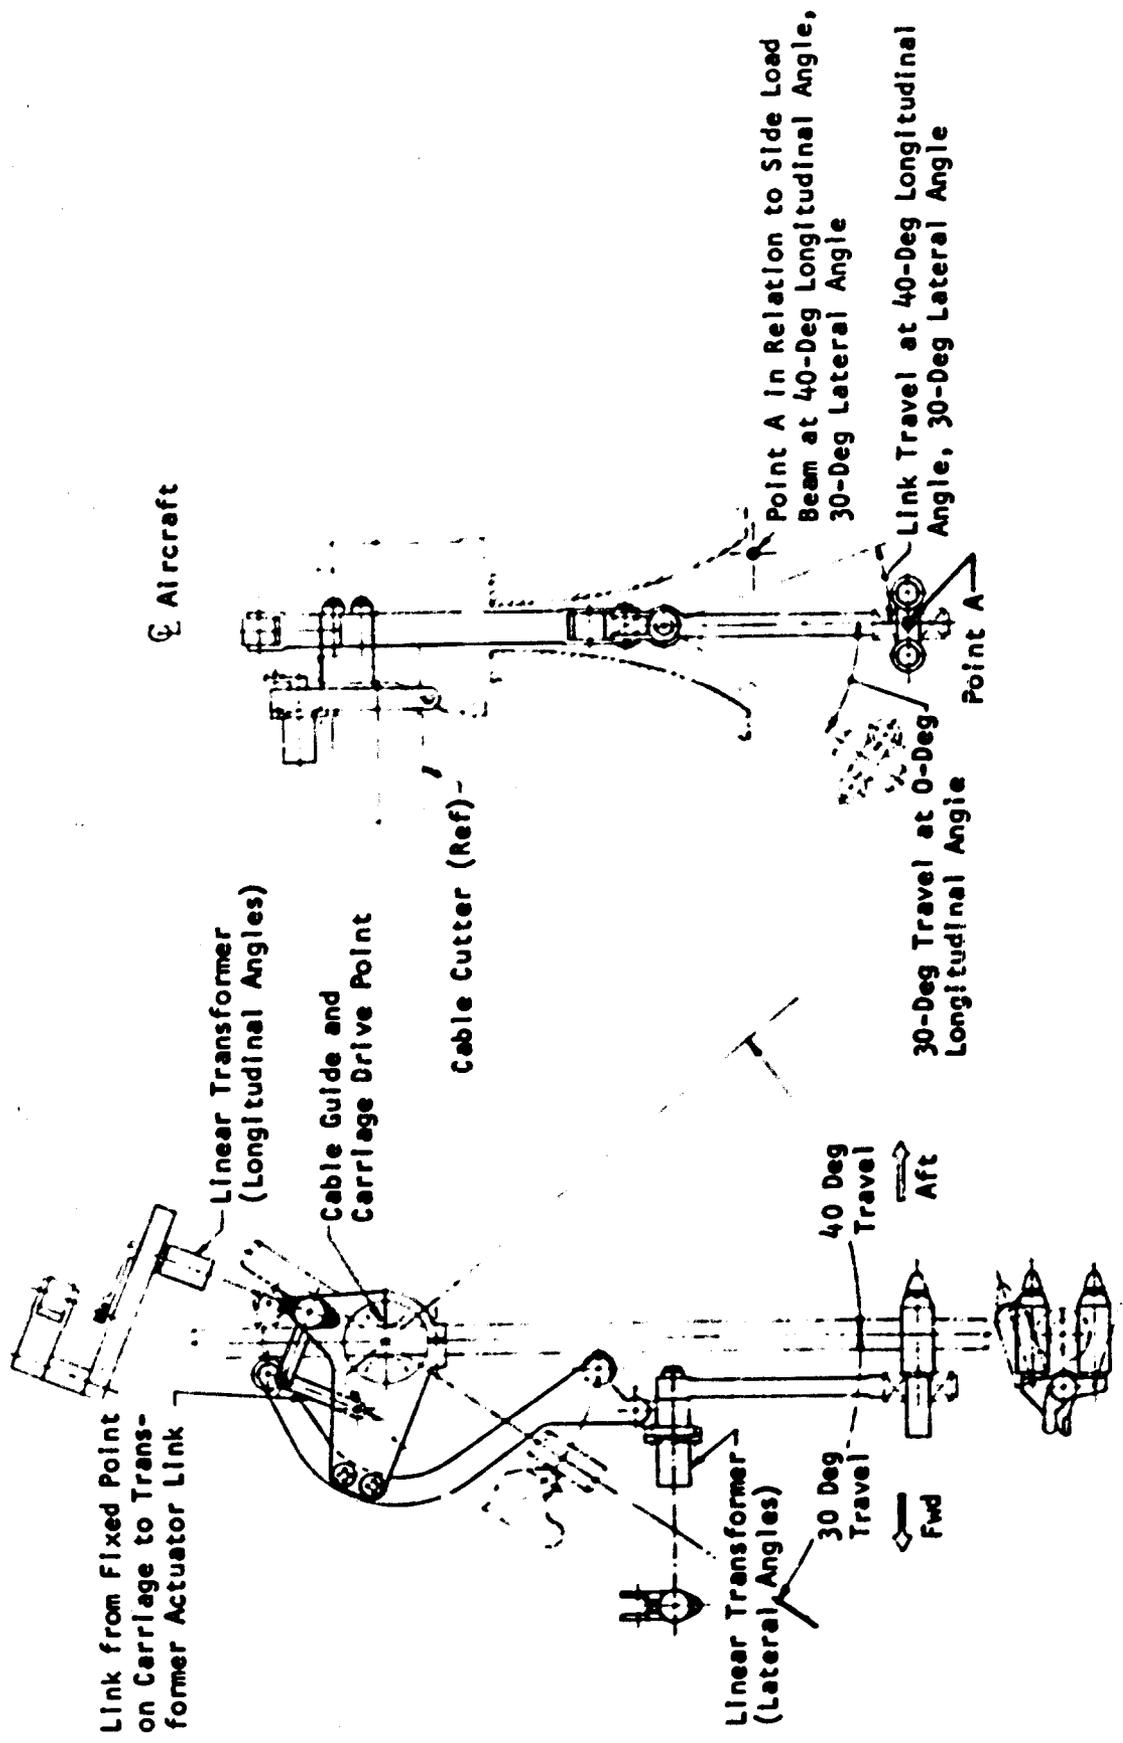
Sketch of Cable-Angle Sensing Mechanism Used by Boeing Vertol in the HLH Winch.
